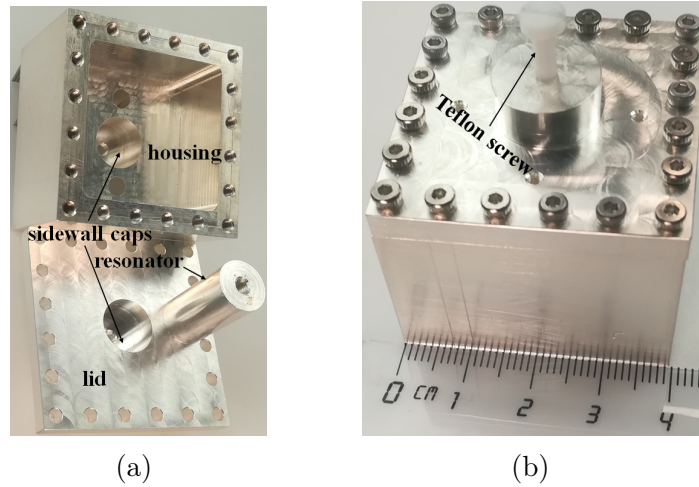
The fabricated inset resonator prototype. (a) Disassembled and (b) assembled.
